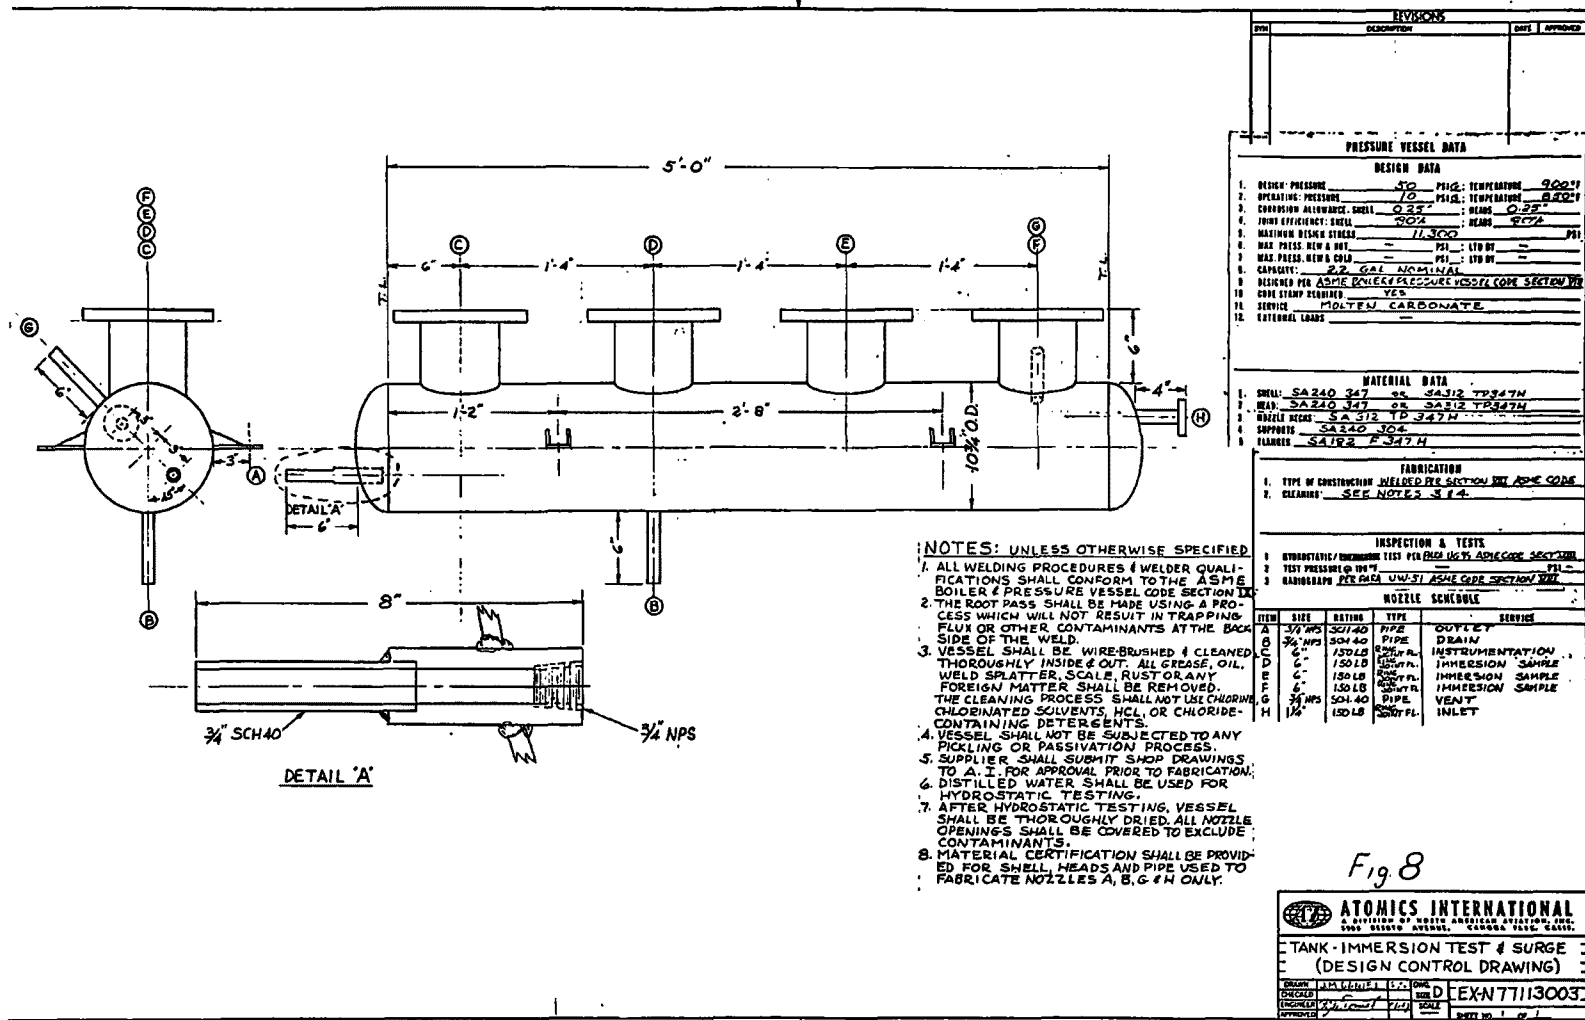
Tank - Immersion Test and Surge (Design Control Drawing)
